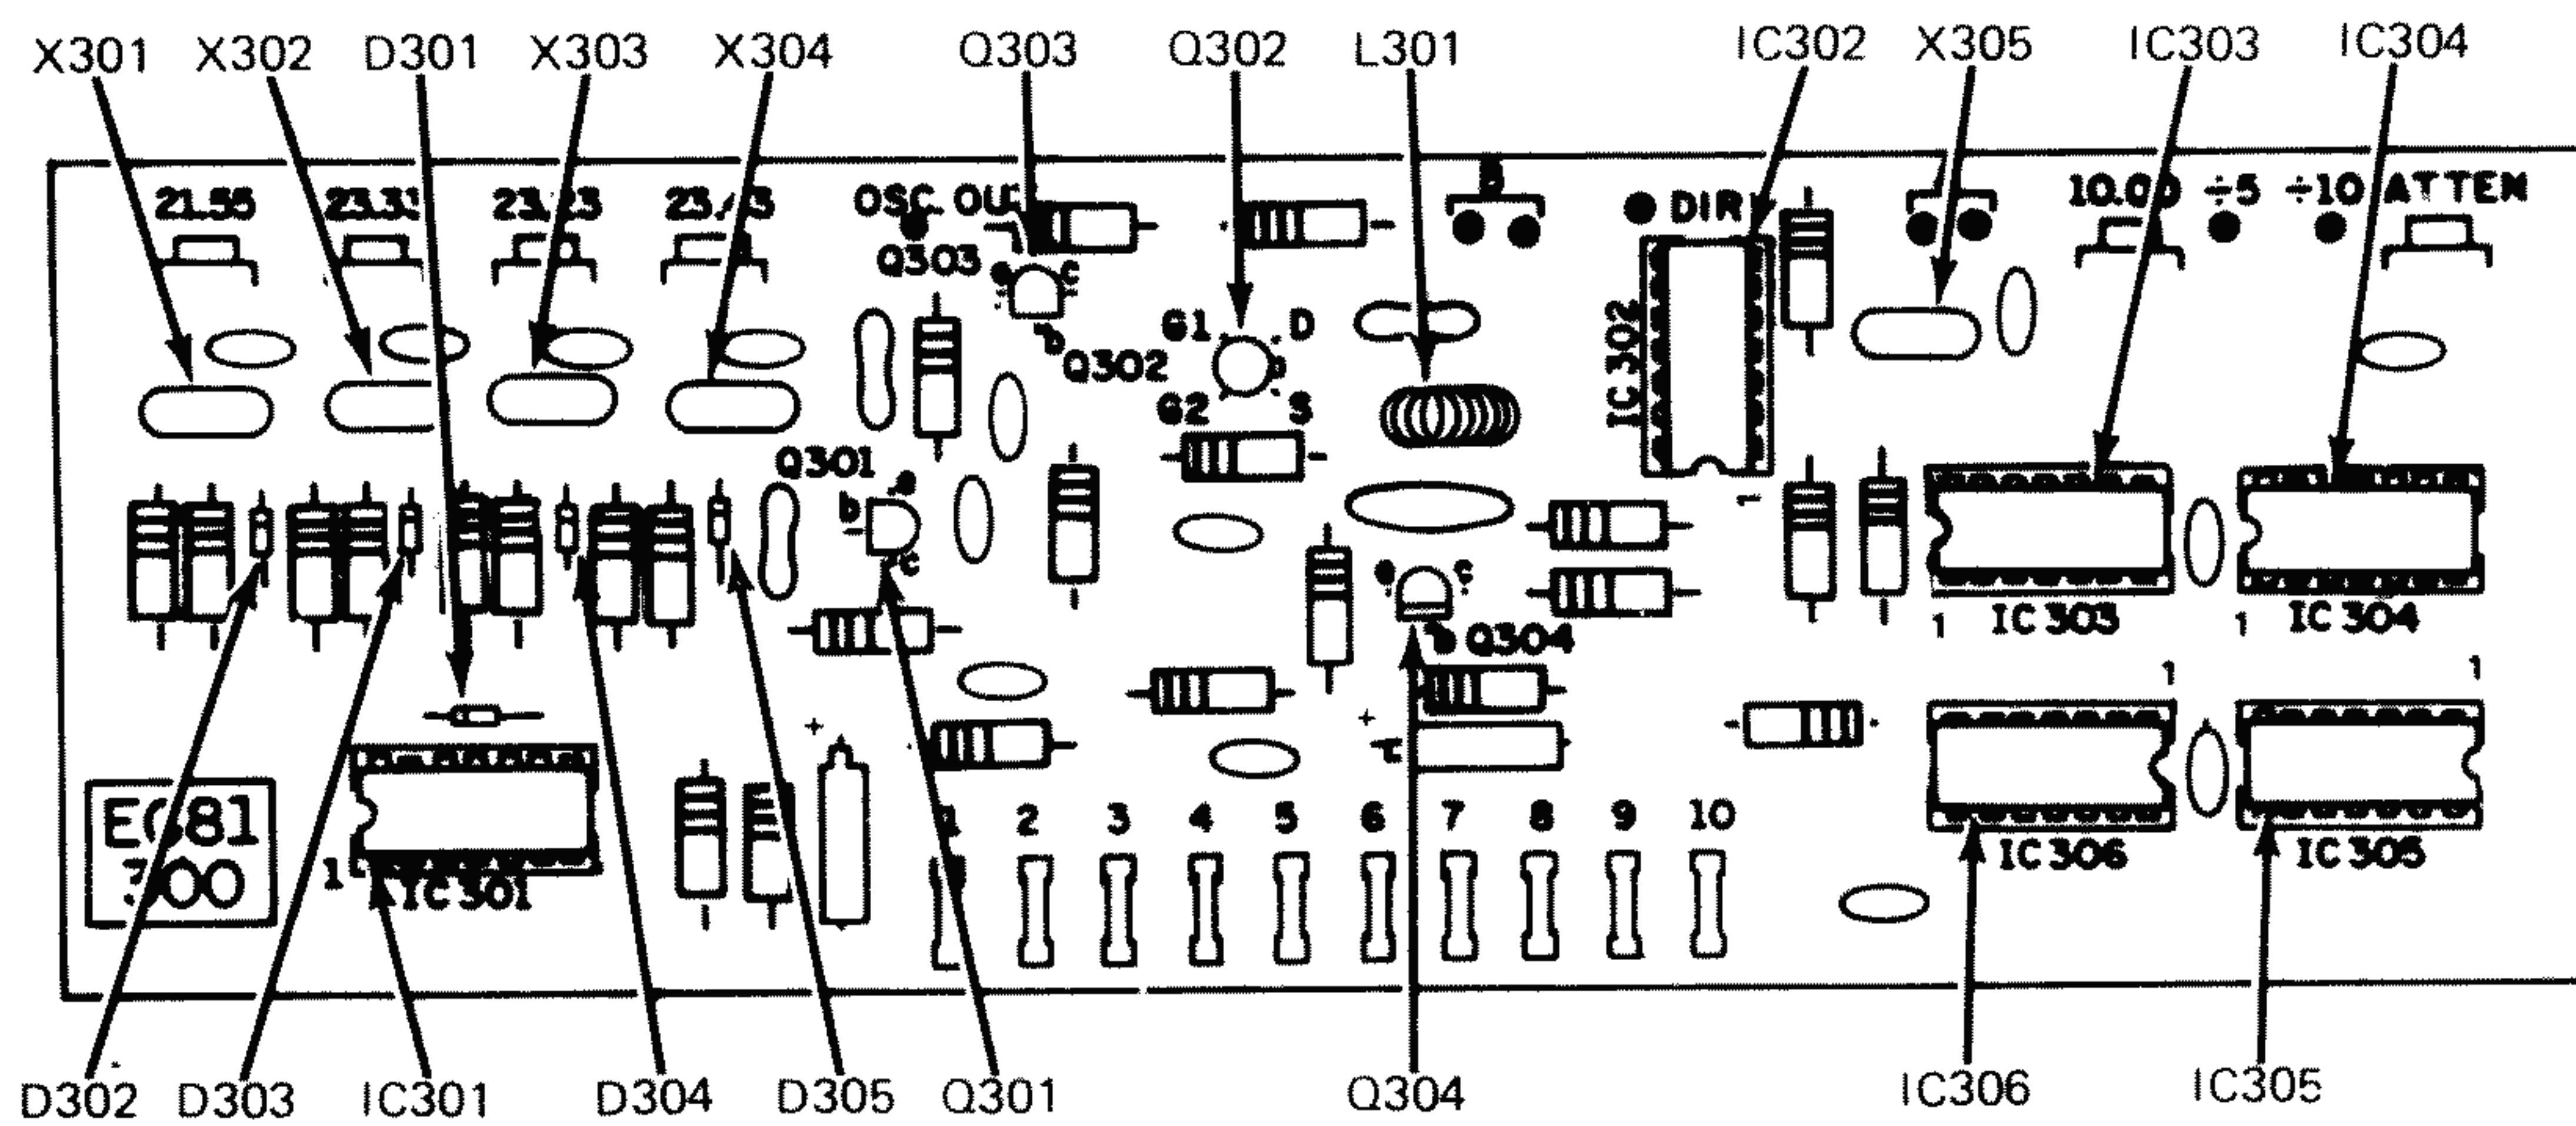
Miscellaneous parts identification on the oscillator circuit board.
